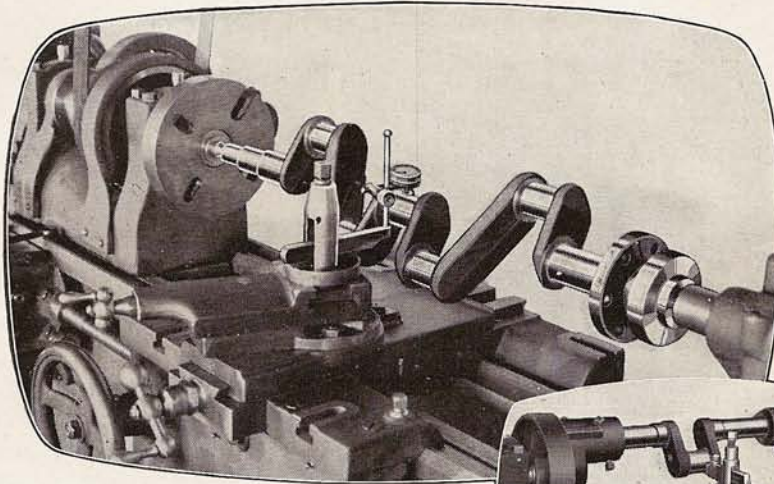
Crankshaft Mounted Between Lathe Centers for Testing.
